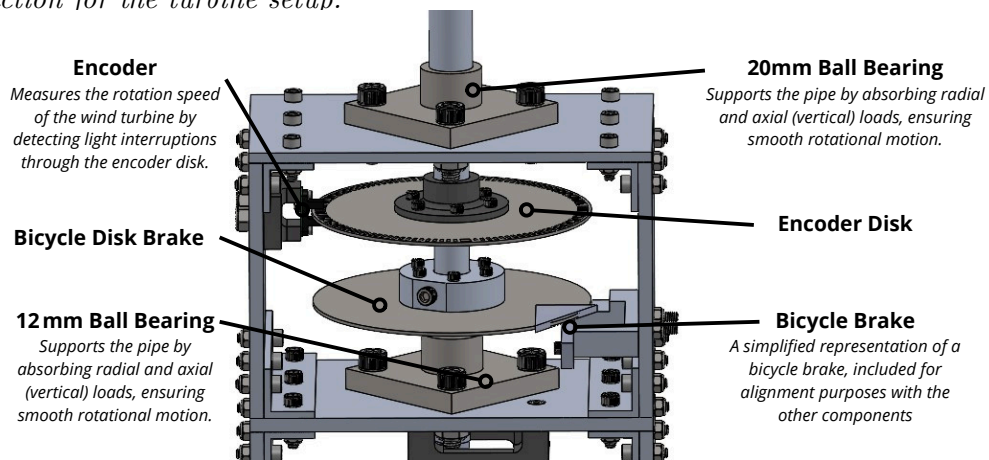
The second platform, which supports the upper bearing and allows vertical alignment adjustments. This view also shows the encoder and encoder disk for rotational measurement, as well as the disk brake and bicycle brake for torque control and safety.
